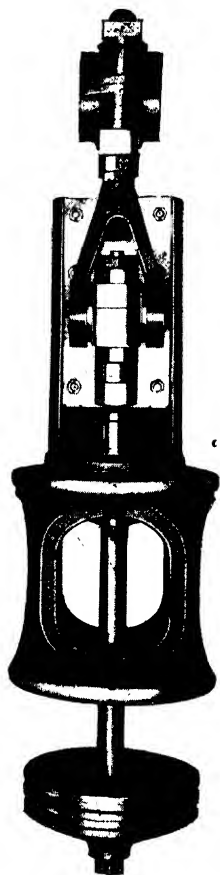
PISTON-ROD LINE AND CROSS-HEAD ASSEMBLY
